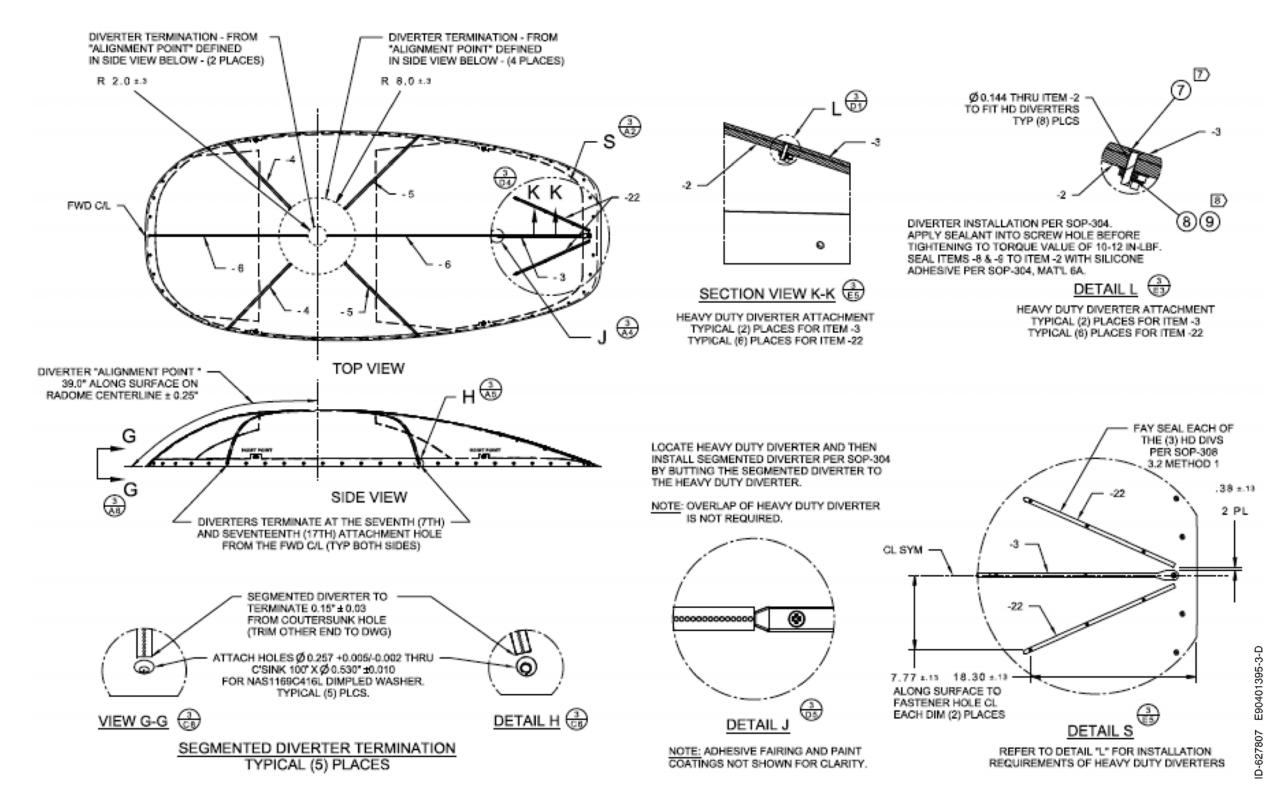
(Sheet 3 of 6) Fuselage Mount Radome Outline and Installation Drawing (90401395, REV D)
